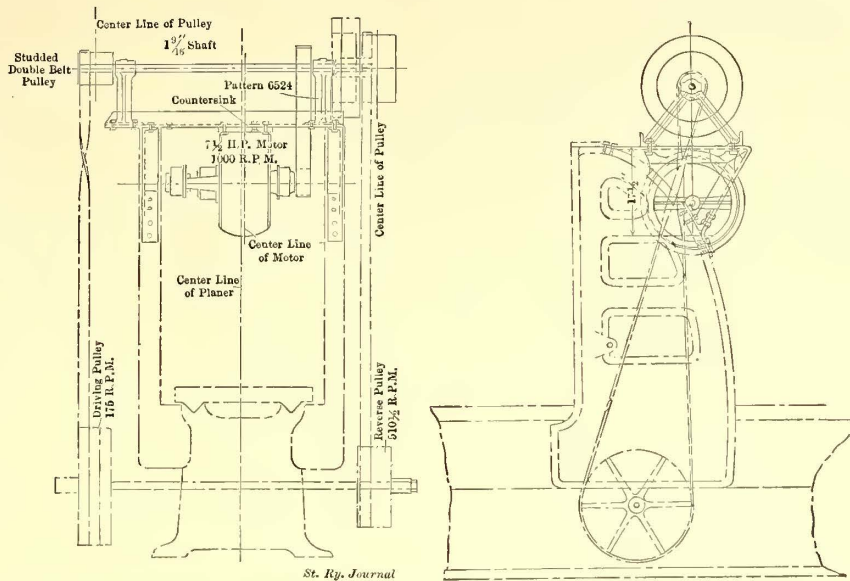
FRONT AND SIDE ELEVATIONS OF PLANER WITH REVISED DRIVE, ILLUSTRATING PARTICULARLY THE MANNER OF MOUNTING THE MOTOR OVER THE BED OF THE MACHINE
